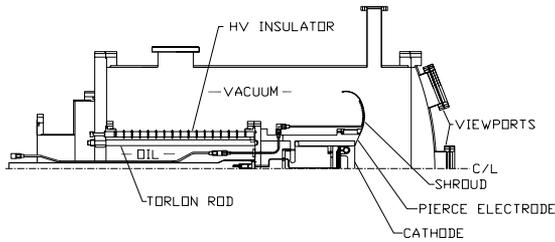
An assembly drawing of the gun and vacuum test chamber.
